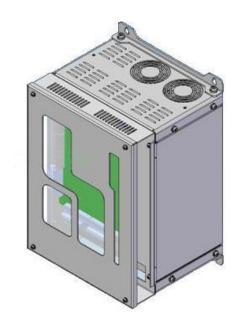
SHIELD TYPE EXTERIOR DIMENSION
